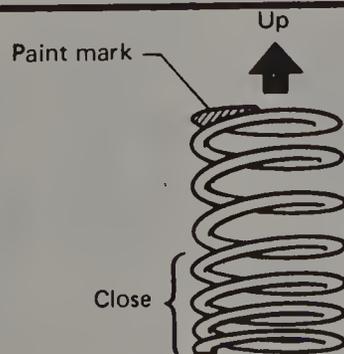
The springs must be installed with the paint mark next to the retainer and the closely wound coils next to the head (Sec 16)
